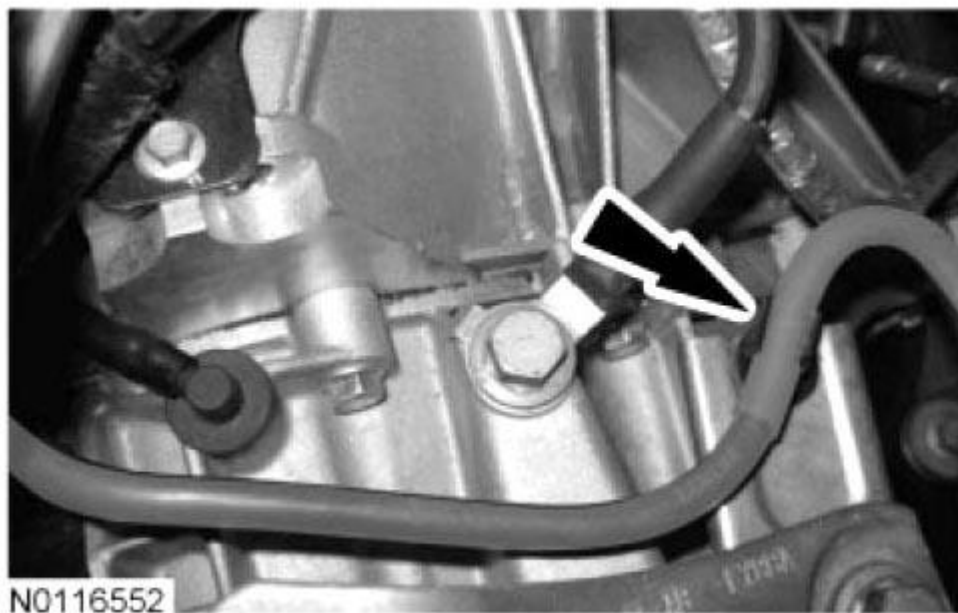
Locating Clutch Hydraulic Hose To Transaxle Retainer
